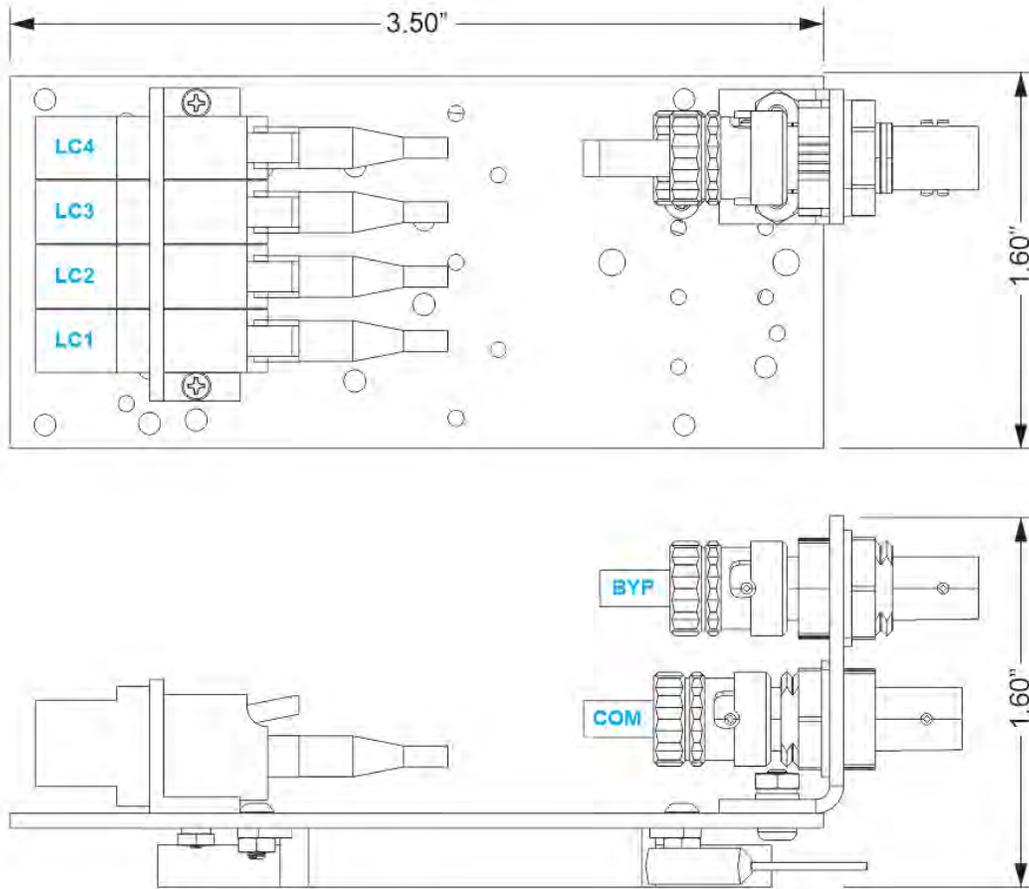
914-CWDM-4R1, 4-Channel CWDM Optics Card with Bypass, Assembly 914-2017-17
